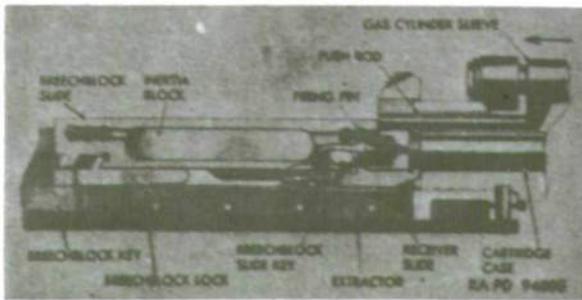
Bolt Unlocked to Permit Blowback Opening. (Lock Raised from Engagement with Breechblock Key)
